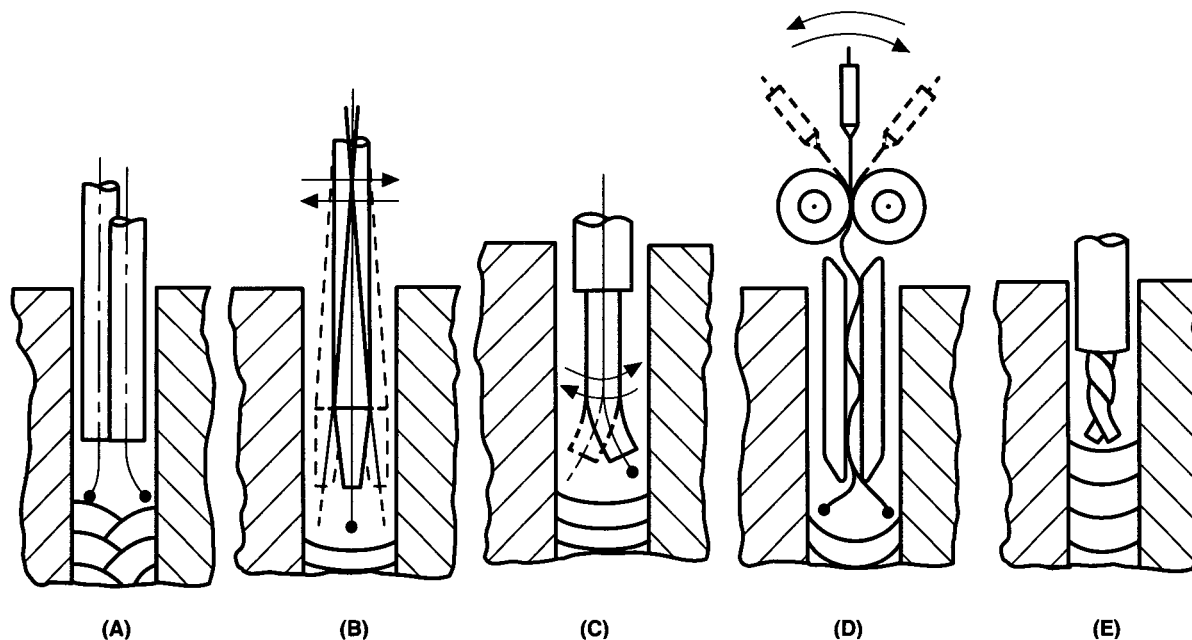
Typical Wire Feeding Techniques for Narrow Gap Gas Metal Arc Welding
